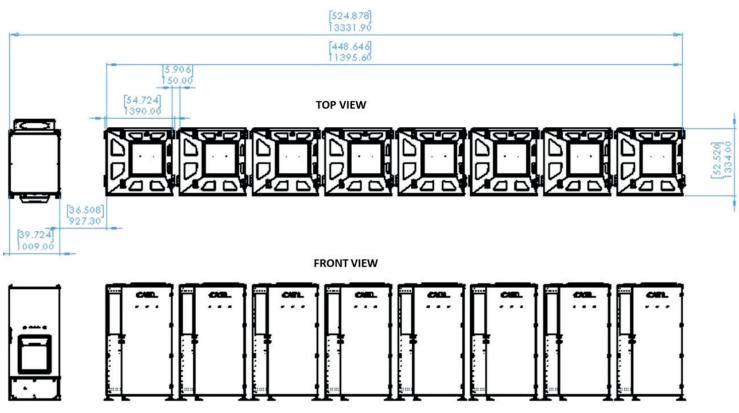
C-Cab XXL with 8 B-Cab XXL Layout with Dimensions
